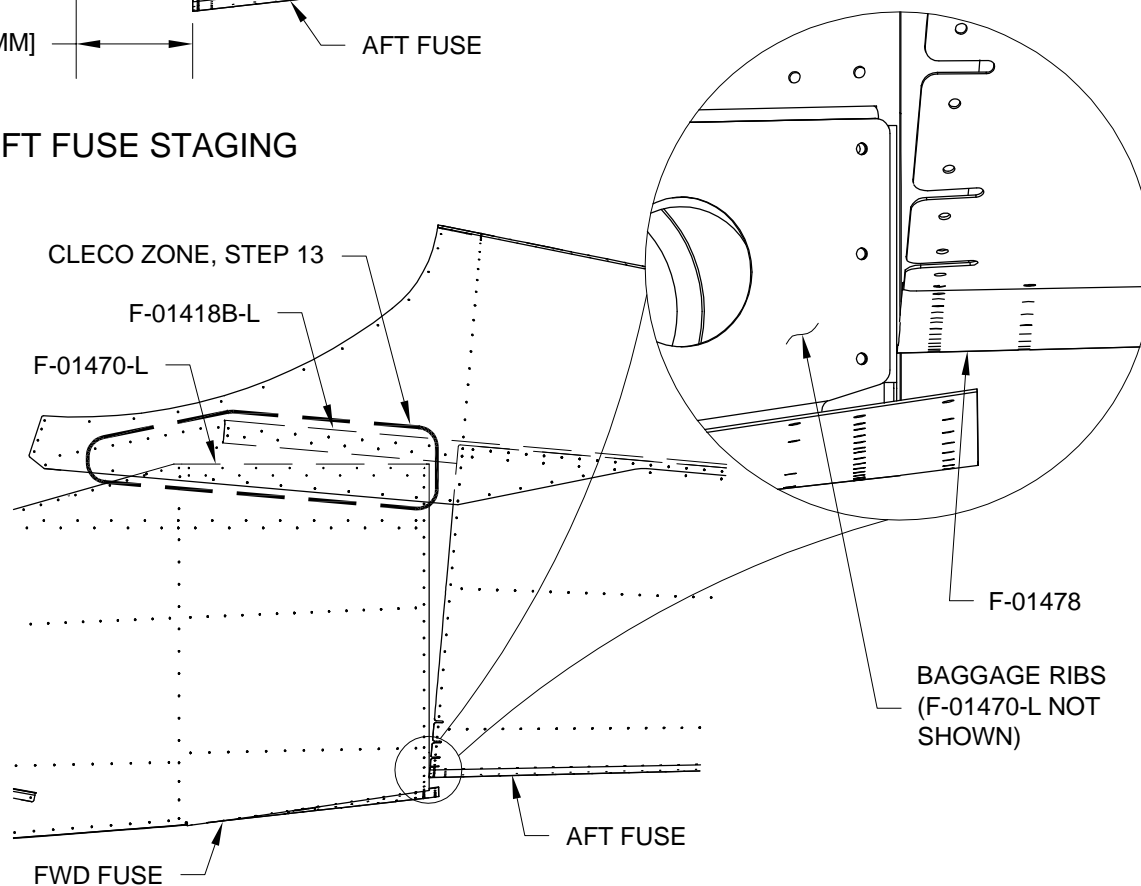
AFT FUSE TO BAGGAGE RIB CONTACT (SOME PARTS OMITTED FOR CLARITY)
